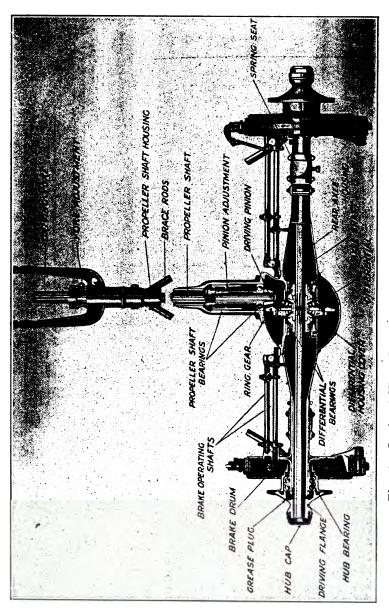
,-Sectional View, Showing Construction of Buick Rear Axle.
